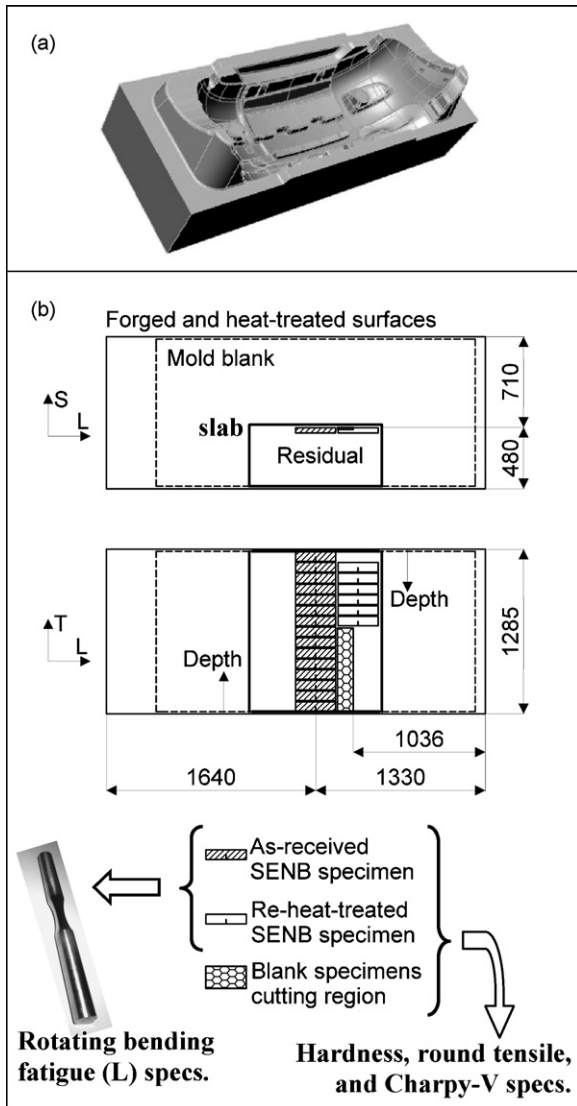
View of half of an automotive bumper mold (a). Sampling plan to obtain 38 mm thick fracture toughness samples and smaller blanks cut at increasing depths inside bloom C (b).
